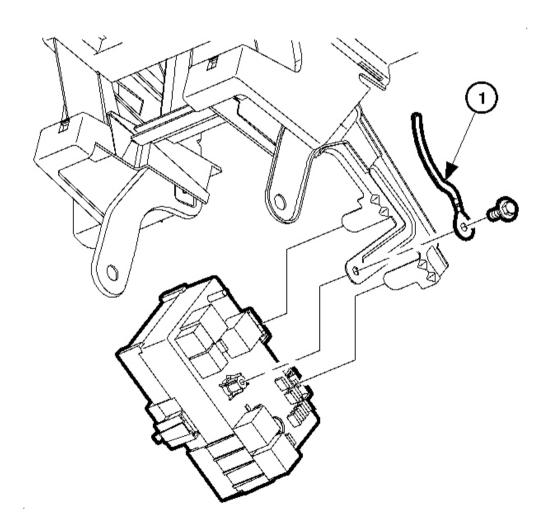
Removing/Installing Fuse Block & Attaching Ground Wire & Bolt Courtesy of GENERAL MOTORS CORP.
